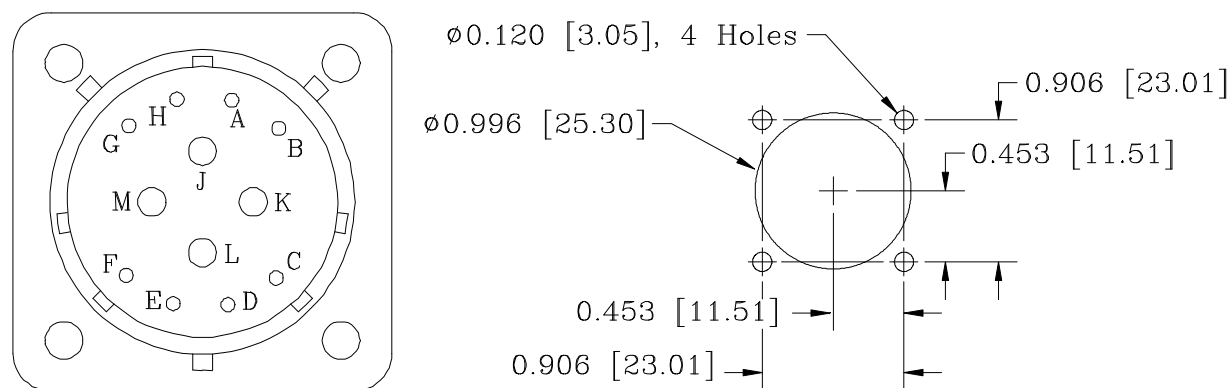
Panel Mount View of the Panel Mount Machine Control Connector and the Connector's Cut Out Dimensions in Inches [mm]
